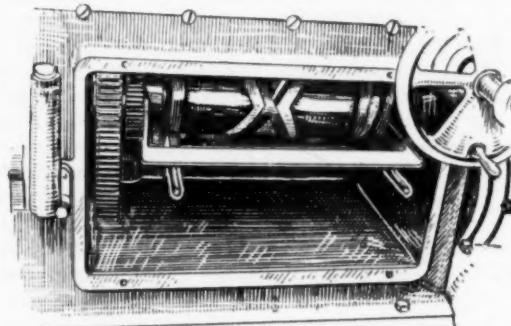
TURRET CAM AND REDUCTION GEARING FOR AUTOMATIC LATHE OF FIG. 5
